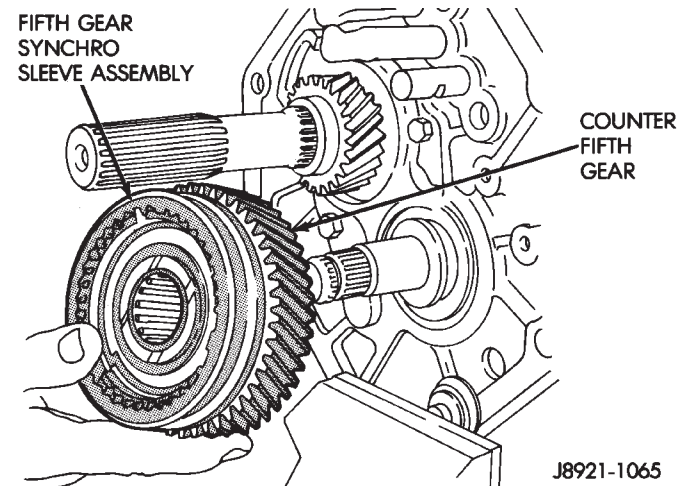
Counter Fifth Gear And Synchro Assembly Removal
